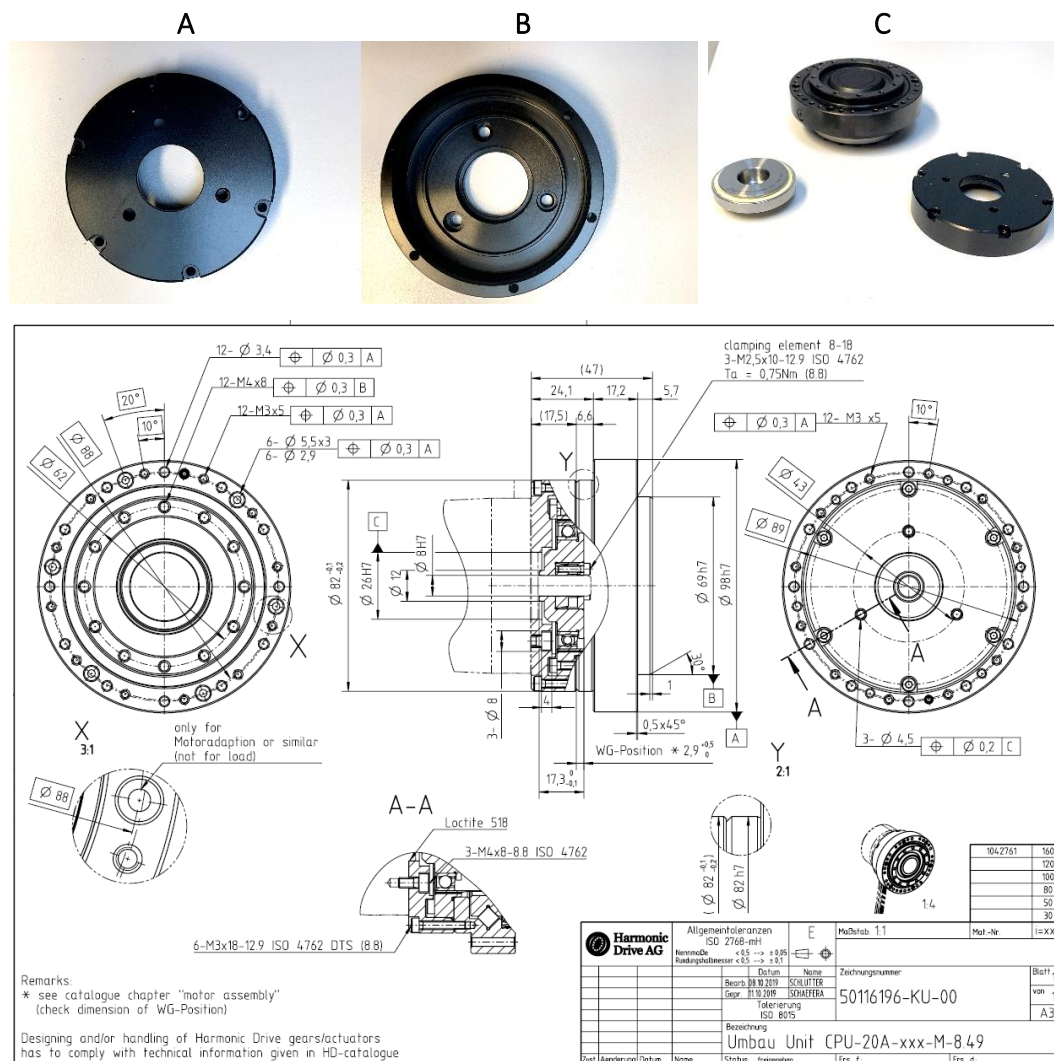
Dimensioning data of the flange for the interface adaptation of the harmonic reducer to the maxon motor. Back (A) and front (B) view of the realized flange, graphical representation of the Harmonic Drive components and the designed flange (C).
